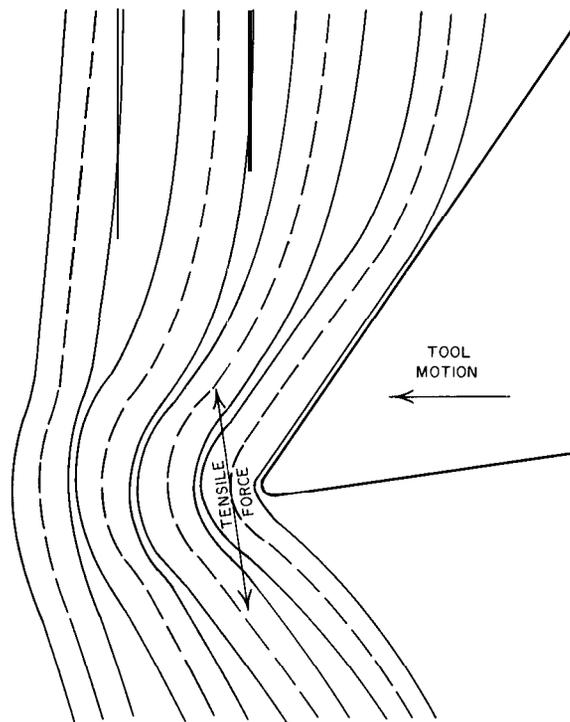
In the 90-90 mode, failure at the cutting edge is due to tension across the cutting plane.
